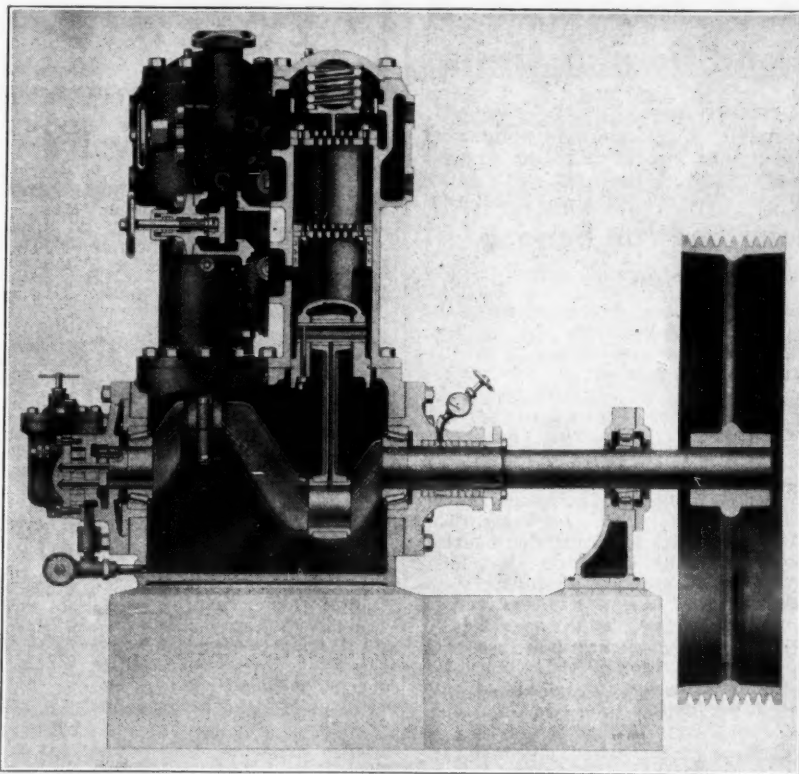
Sectional view of a Carbondale vertical, 2-cylinder, Freon compressor. Note use of the tapered roller bearing on the crankshaft, details of lubricating system for automatic and positive circulation of oil, and design of the stuffing box.
